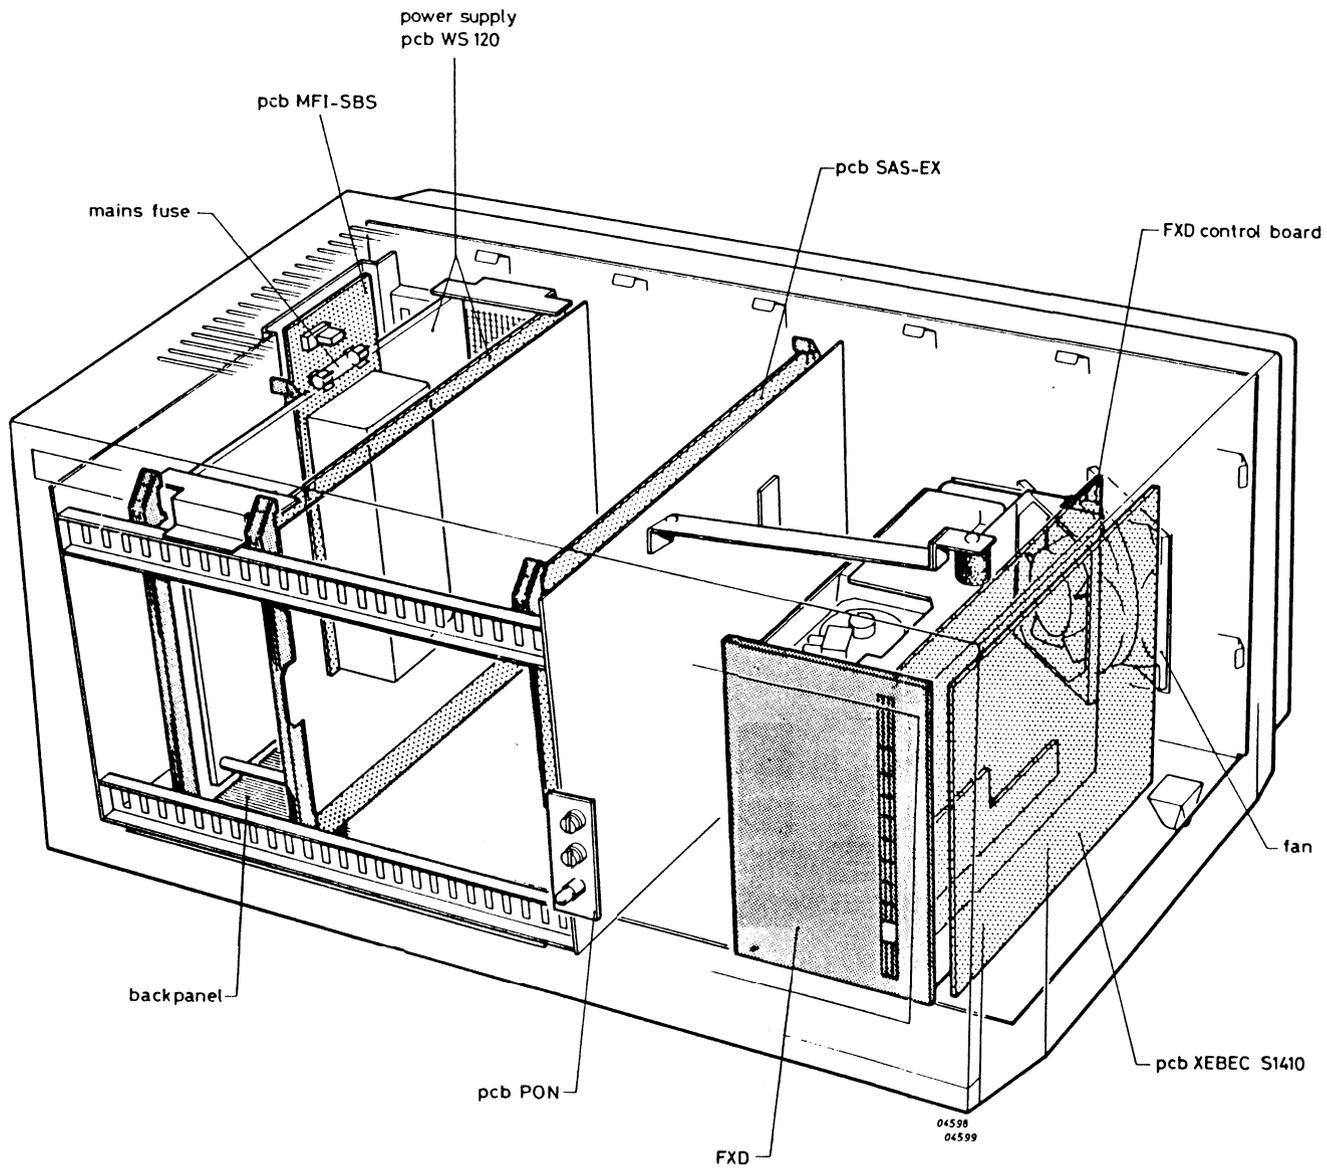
LOCATOR OF EXTENSION CABINET P3012-30/33
